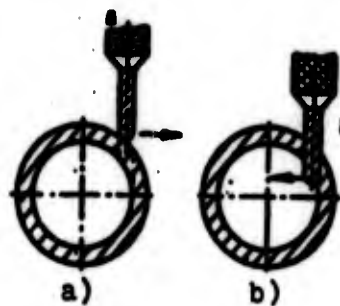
Squeezing of the drill with drilling of tangential holes.
